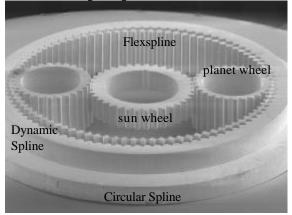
Components of the Micro Harmonic Drive[®] Gear
